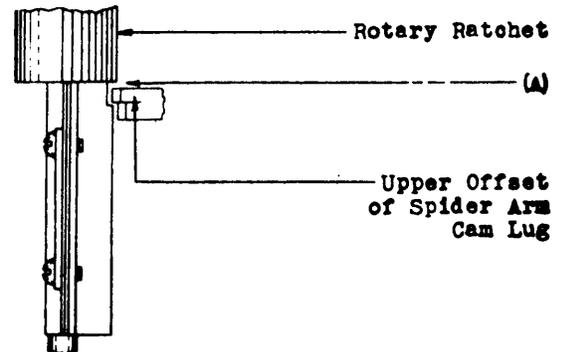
Clearance Between Rotary Ratchet and Upper Offset of Cam Lug
